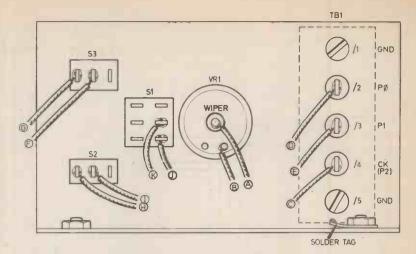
Position of the components on the Manual Controller front panel with complete wiring details to the p.c.b. This panel is "earthed" via the solder tag connection at one panel fixing.
